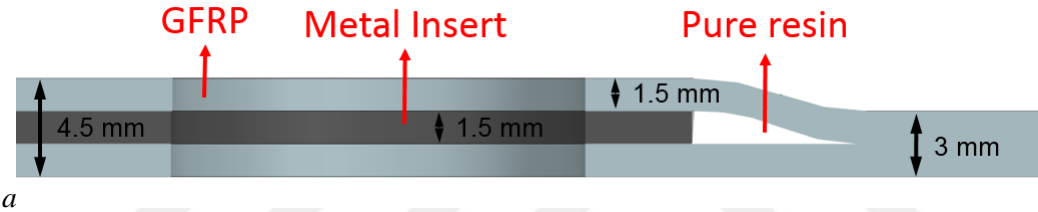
The cross-section dimensions of the composite laminate with metal insert
